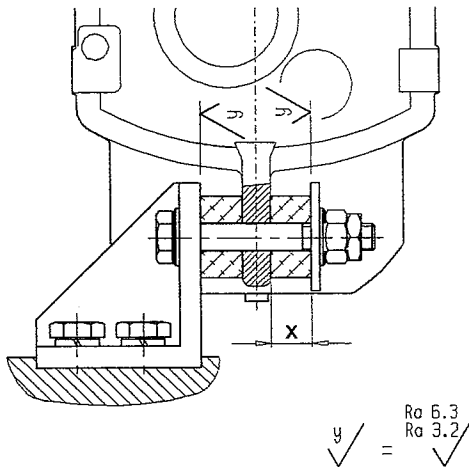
Torque arm on parallel shaft helical gear unit
